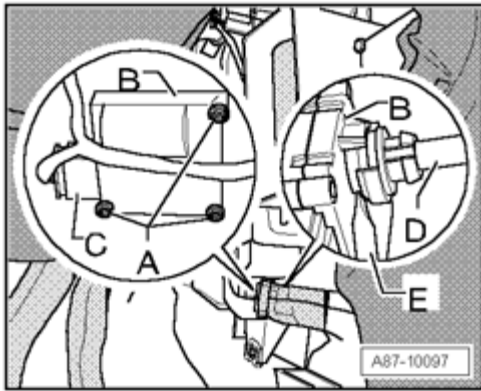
Identifying Connector, Bolts, Connecting Element, And Control Motor
